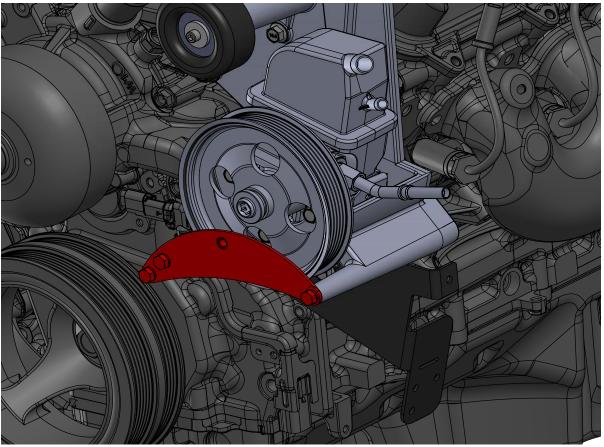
Crescent Bracket Reinstall on the Clutch Housing (belt and hoses hidden for clarity.
